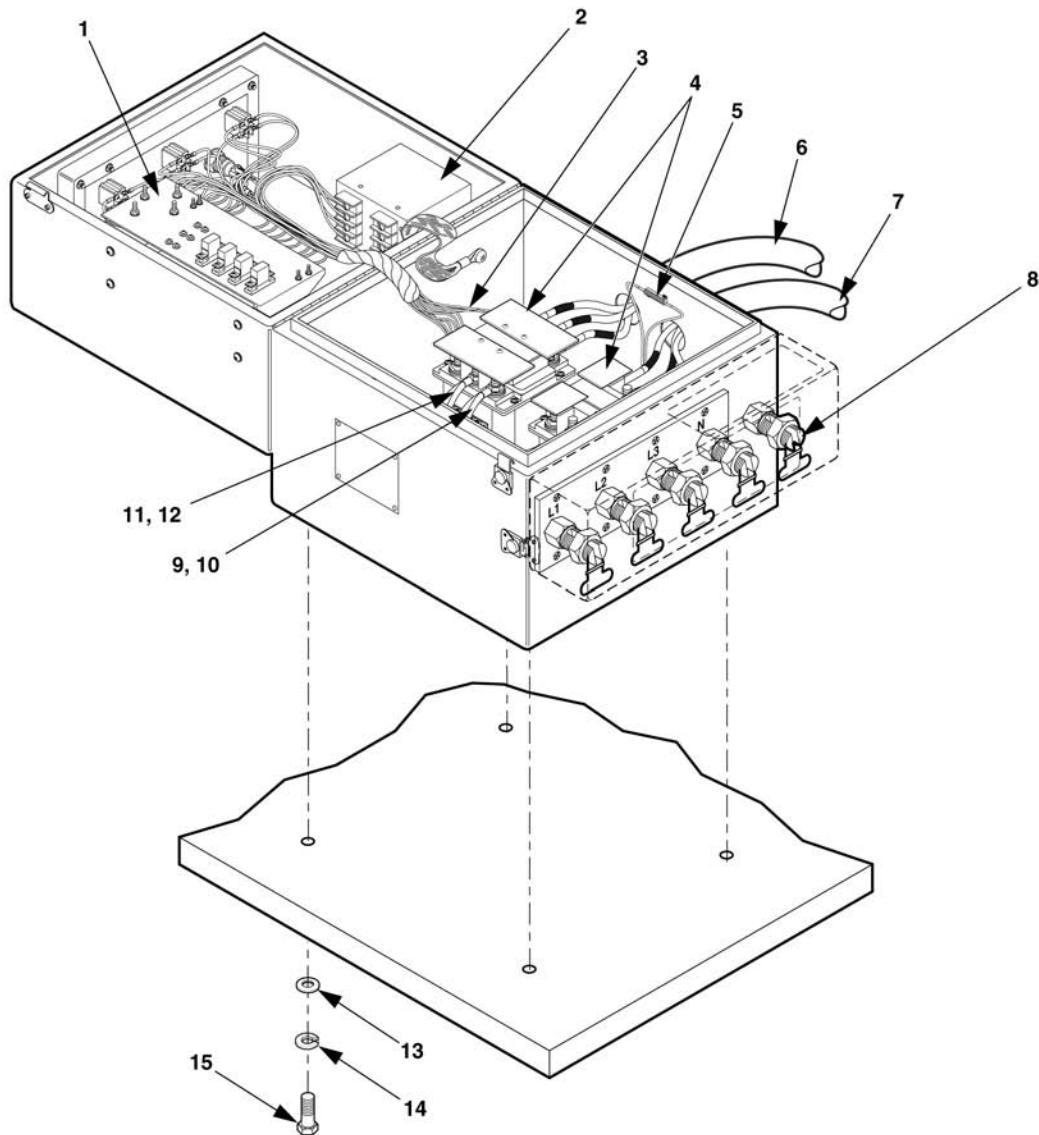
Switch/Box Assembly, 97403 13230E6950 (Sheet 1 of 3)
